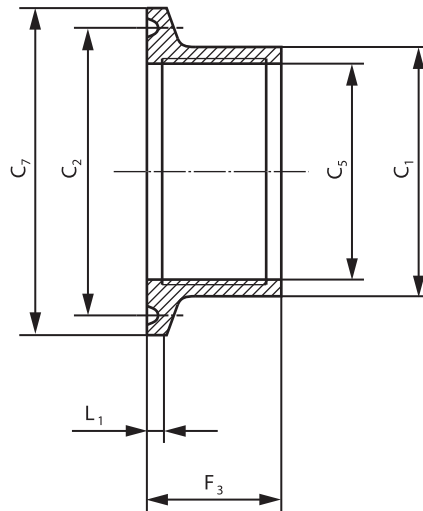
Sectional drawing of a clamp fitting acc. to ISO 2852 - CO
